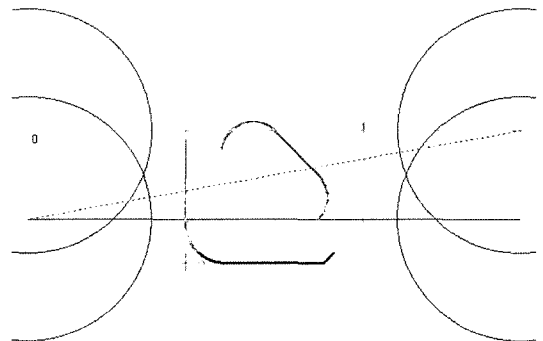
The example of exit burr identification in multi-path and complex features(Burr is on the bold line segment)
